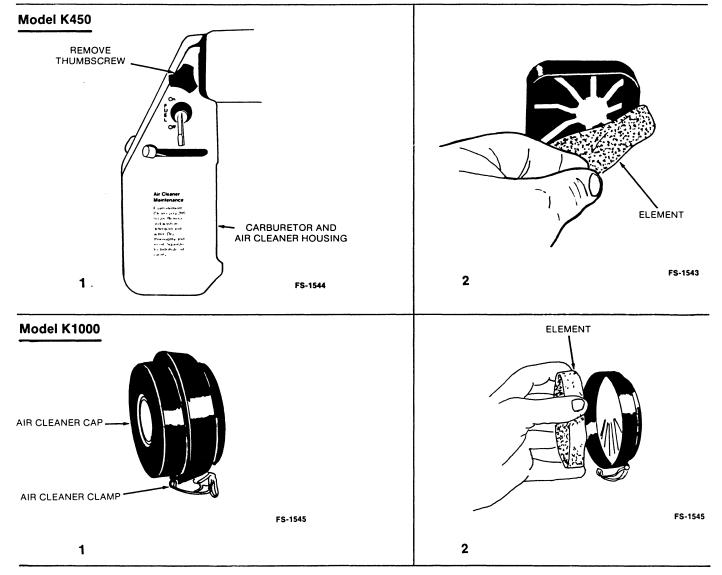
REMOVING AIR CLEANER ELEMENT
